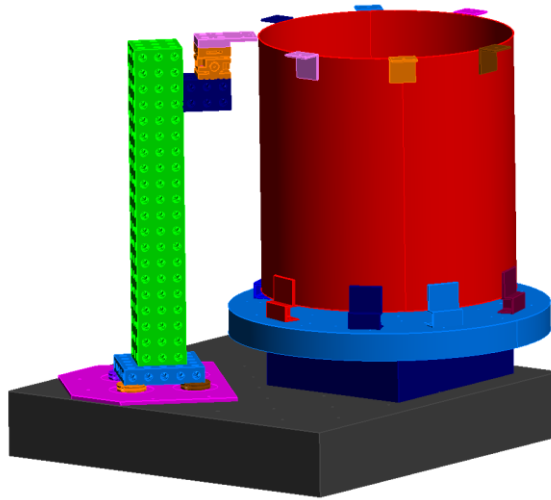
Cylinder-to-cylinder bracket bonding tooling setup. Single tooling structure used to position bracket during bonding procedure.
